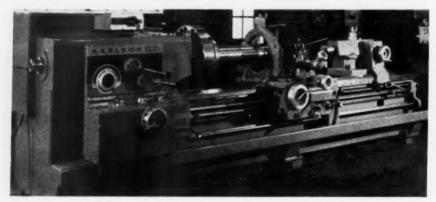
This is the all new Clearing-Axelson 2516 Welded Steel Blue Chip Lathe
